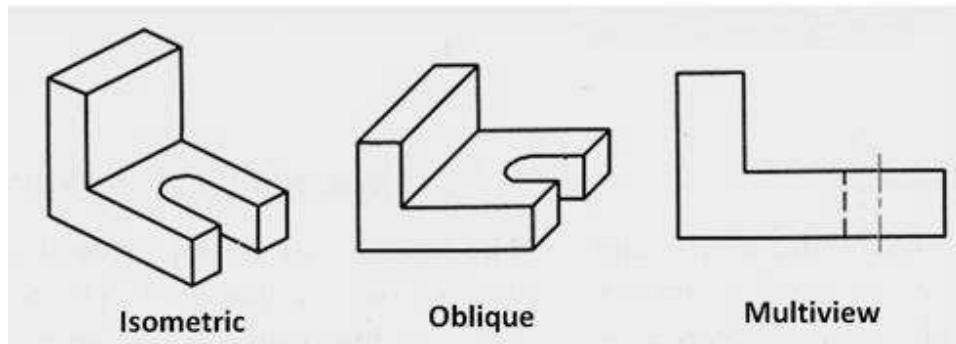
Orthographic projections of a solid showing isometric, oblique and multi-view drawings.
